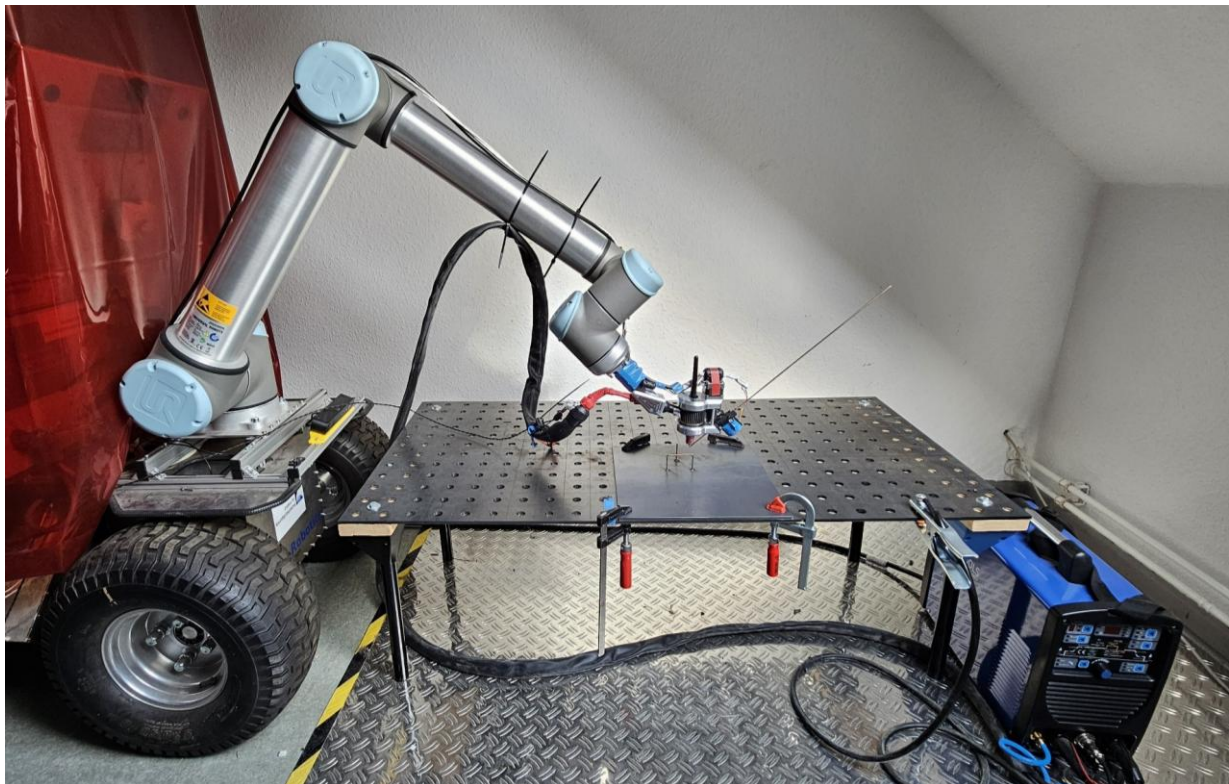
Setup for metallic truss fabrication using a UR10 robotic arm and a TIG welding machine as a heat source.
